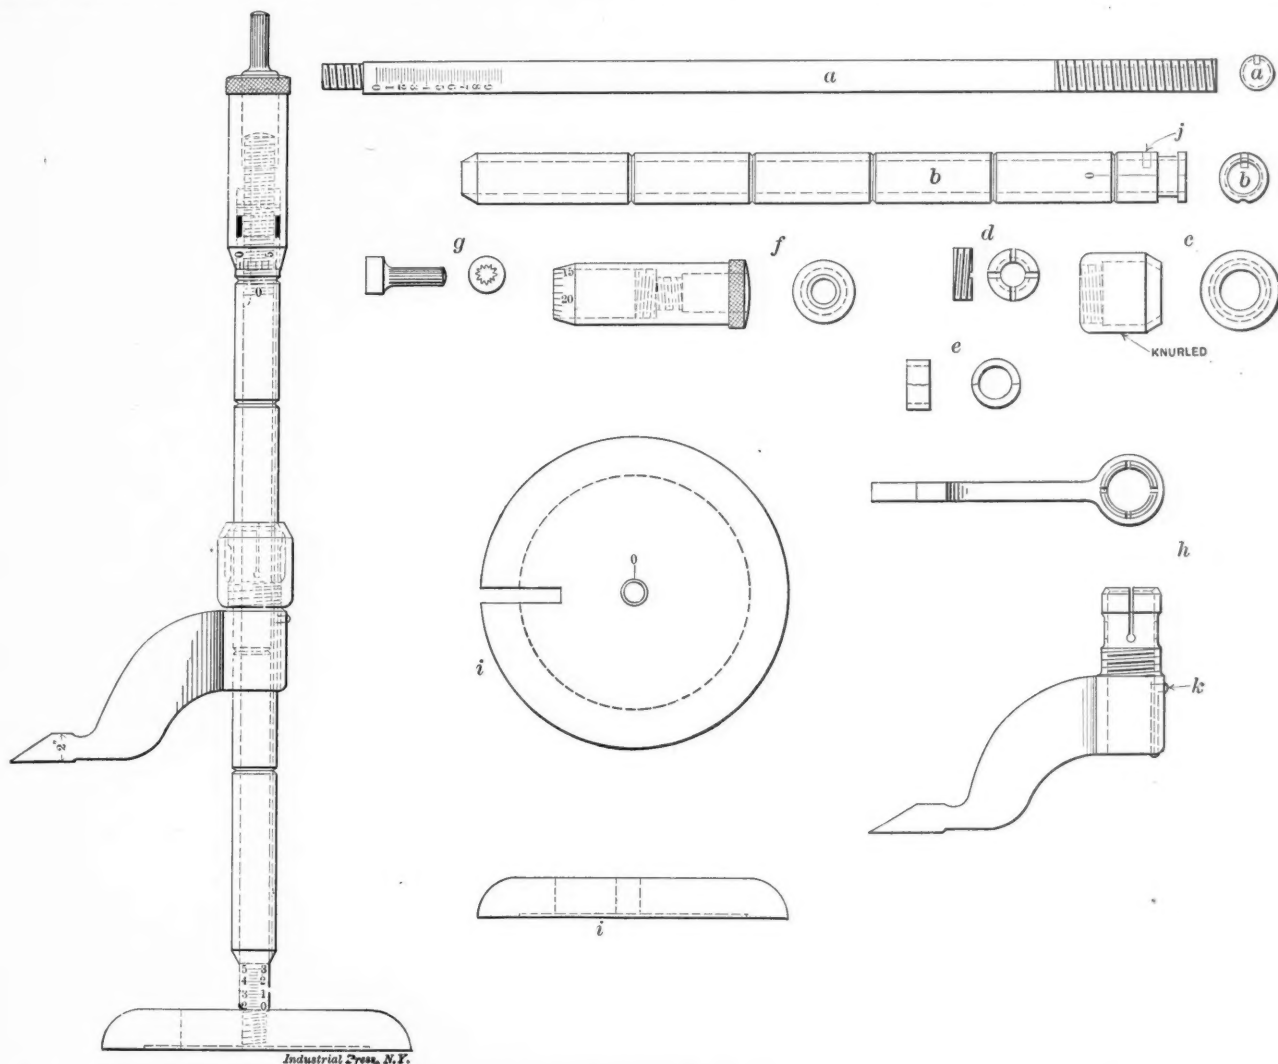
Assembled View and Details of 5-inch Micrometer Surface Gage. The Spindle and Micrometer parts are used in other Combinations shown in the following Views.
